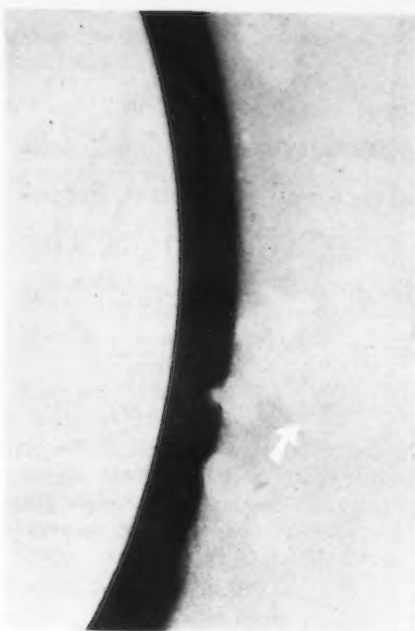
Section of Gray Iron Casting of About One Inch Thickness. The arrow indicates the major defects, blow-holes
